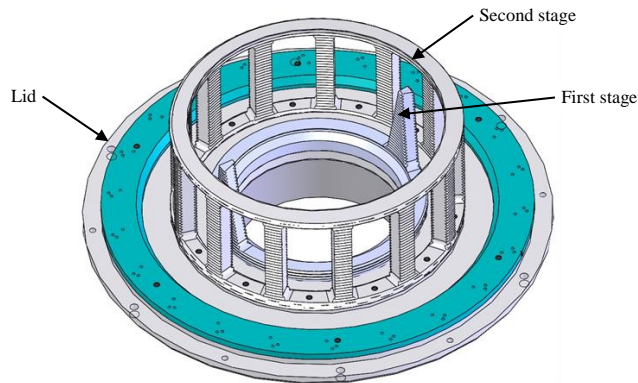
Stator assembly (to provide a dimensional reference: the external diameter of the lid is 380 mm).
